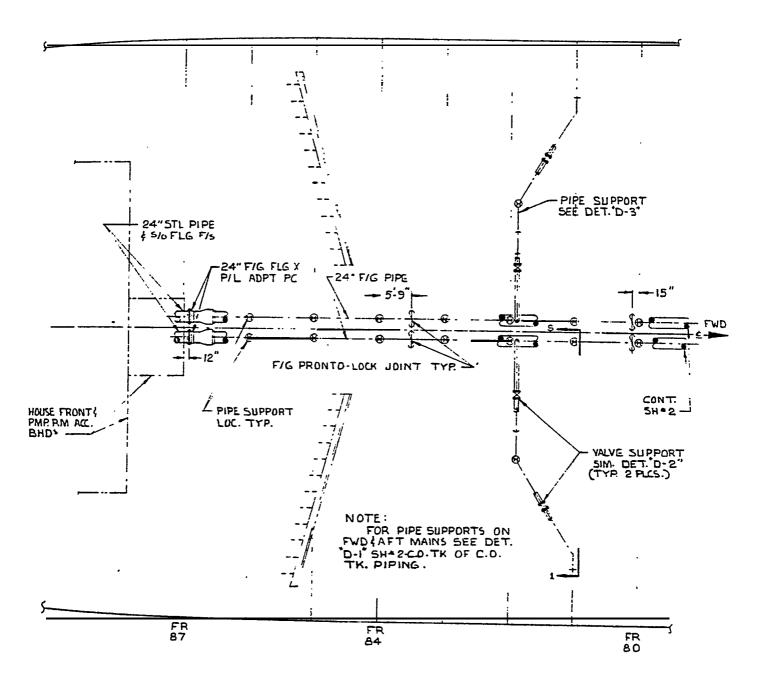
Arrangement of Fiberglass Cargo Deck Piping (Aft).
